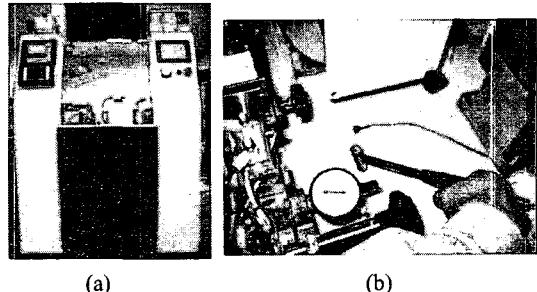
Ultra co-axial grinding machining system(a) and experimental Setup(Impact Excitation Test)(b)
